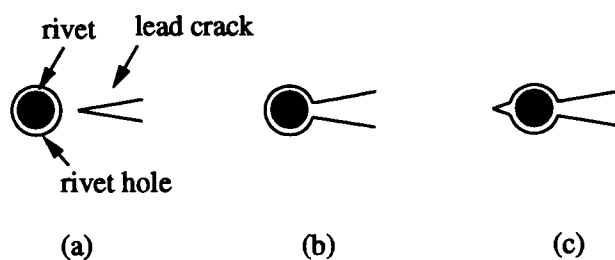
Illustration of crack propagation near rivet: (a) lead crack approaching rivet (b) lead crack growing into rivet hole, and (c) new crack initiating out of rivet hole.
